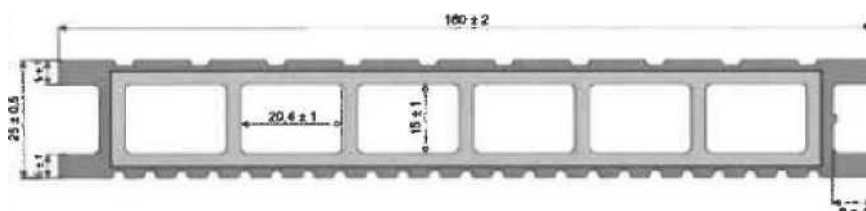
GAMRAT WPC Decking Board 160x25, Double-Sided Grooved
